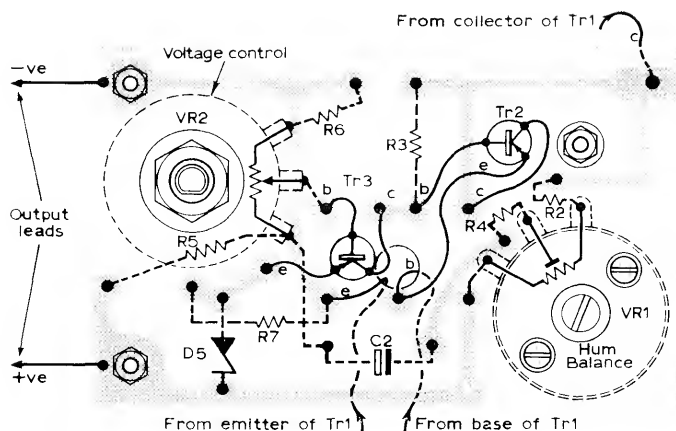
Details of the printed board of the power pack (copper parts shaded), together with component connections.
